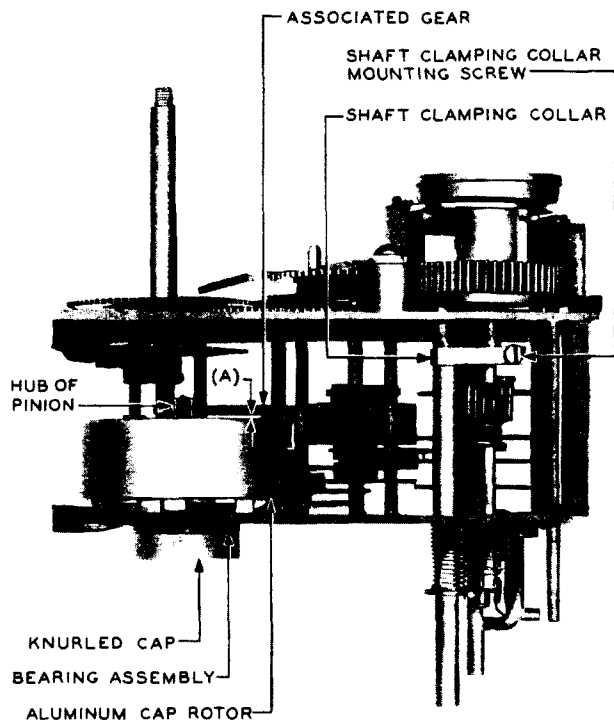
Illustrating Motor With Aluminum Cap Rotor
